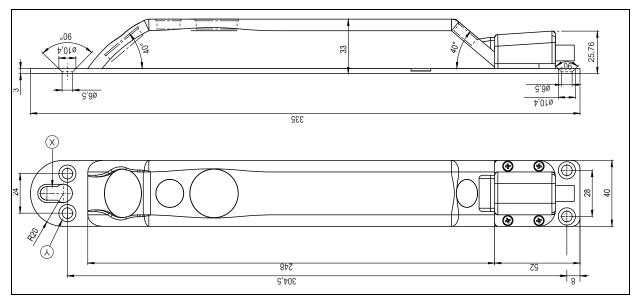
Dimensions air-ultrasonic sensor, type OCL
